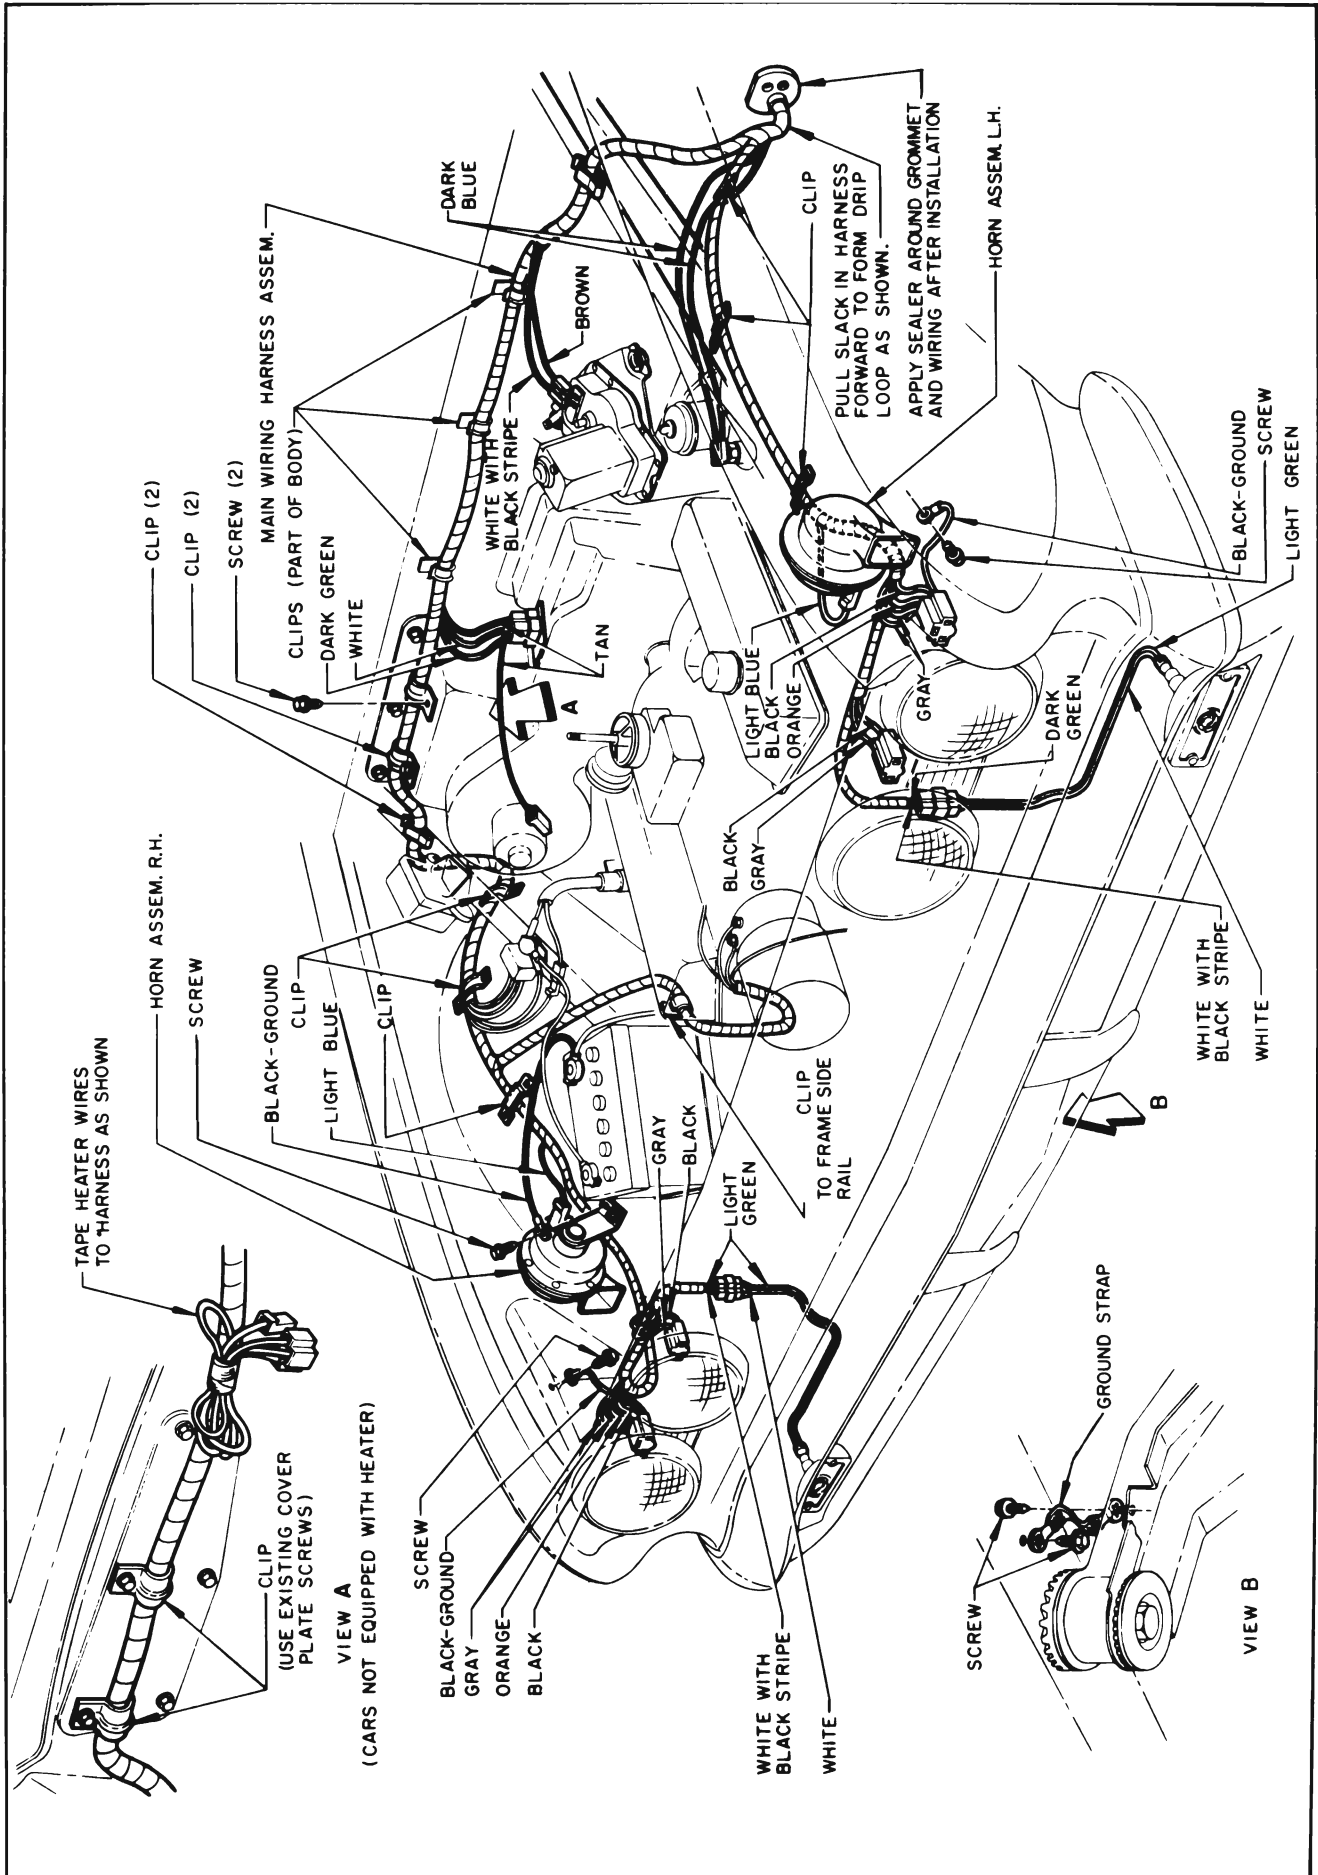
W/S Wiper, Heater, Horn, Headlamp and Parking Lamp Wiring
